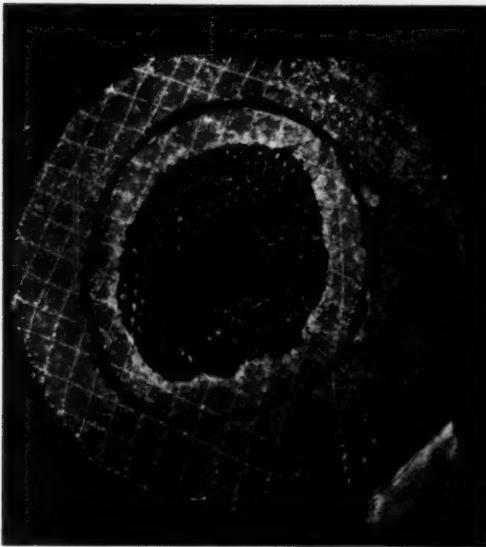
Honeycomb core patch inserted. Patch is purposely cut somewhat oversize; note slight compression around outer edge
